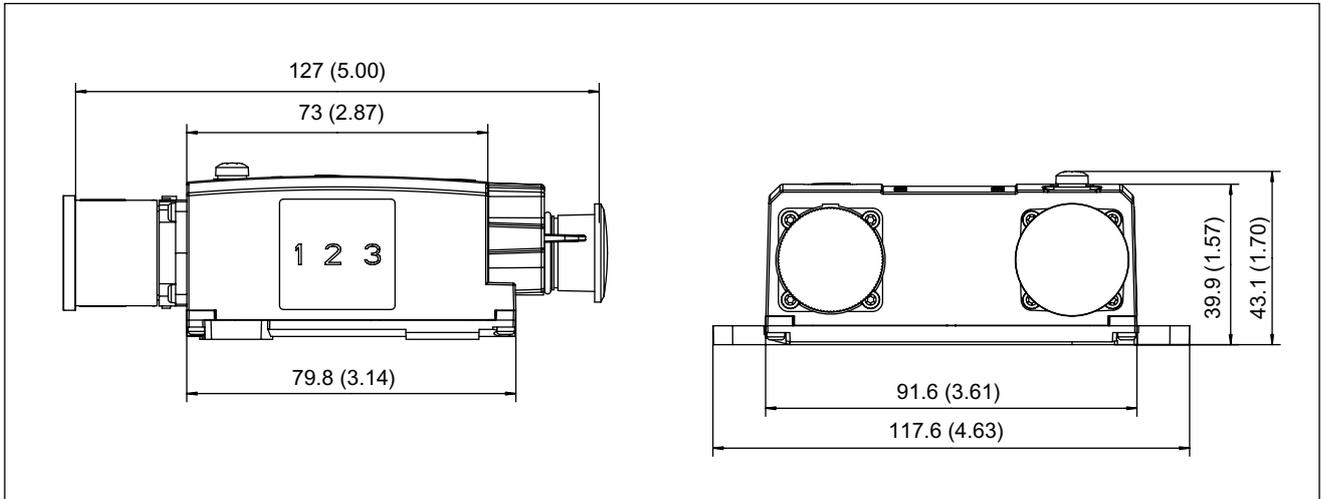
Dimension drawing SME120, Order number 6SL3055-0AA00-5JA3
